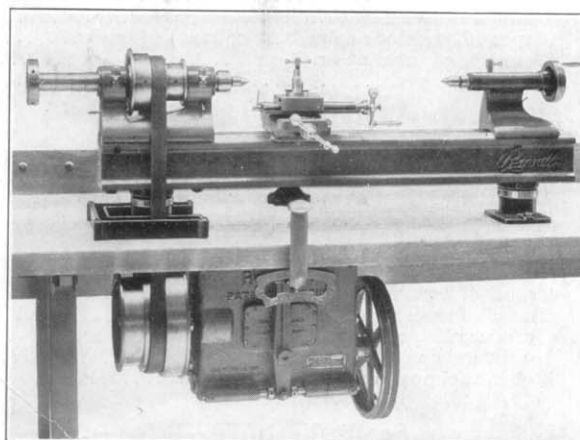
Rivett Series 507 lathe on bench with Speed Box Motor Drive, hand lever control, Jack Pedestals, and Belt Guard
